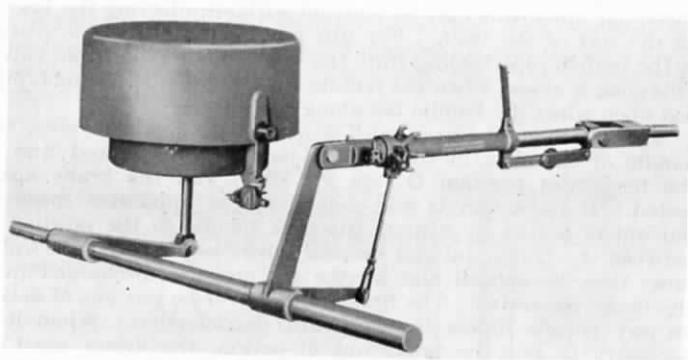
"WESLAK" SLACK ADJUSTER SHOWN AFTER RESETTING.
